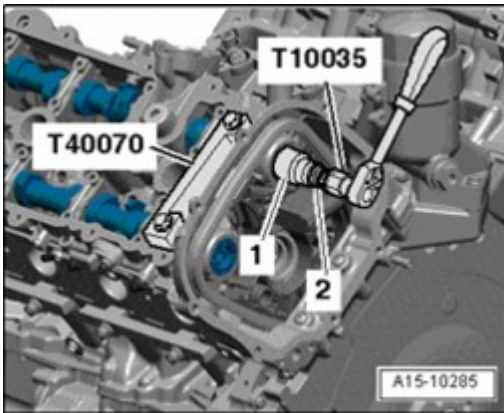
Rotating Intake Camshaft To "TDC" And Tightening Camshaft Adjuster Screw On Camshaft With A Socket SW 24 Inserted Between
